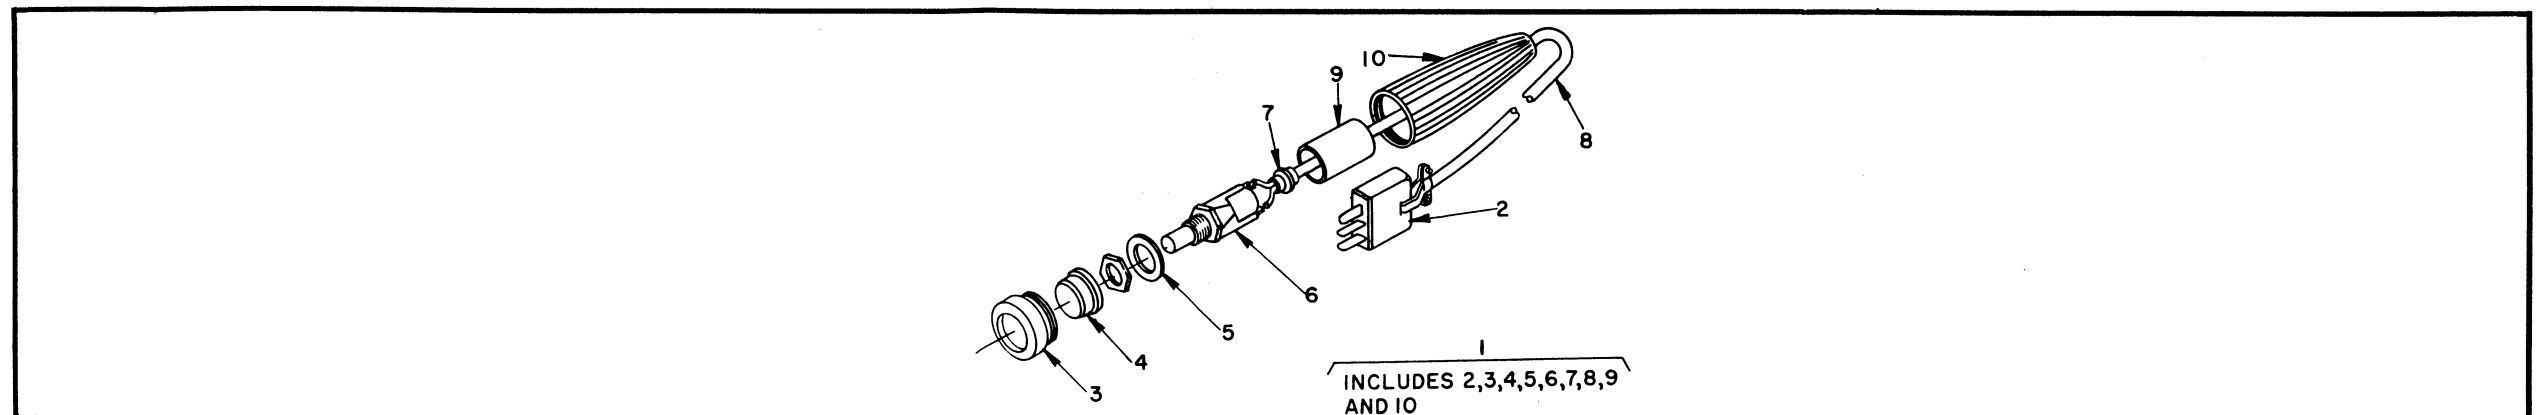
Exploded View of Model 765S Remote Control Push Button Assembly
